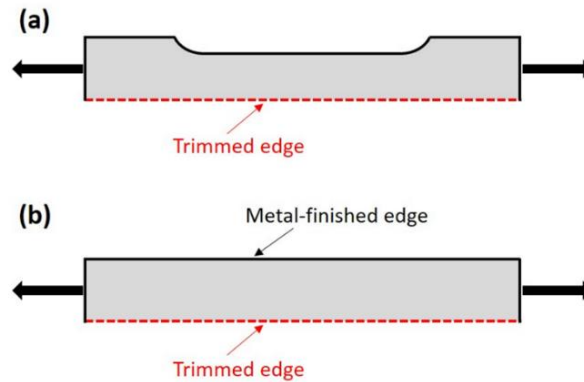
Tensile testing of trimmed specimens: (a) half-a-dog bone specimen and (b) sheet metal strip with one edge trimmed and the other edge polished.
